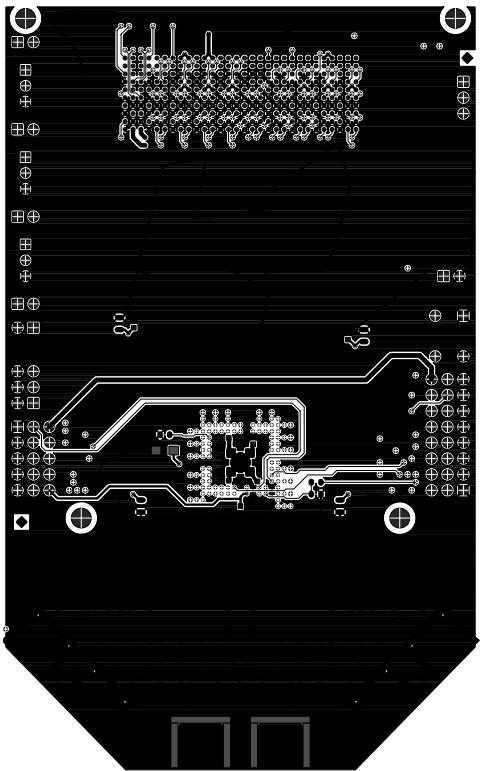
Si5100-EVB Layer 8—Solder Side (Daughter Card)
